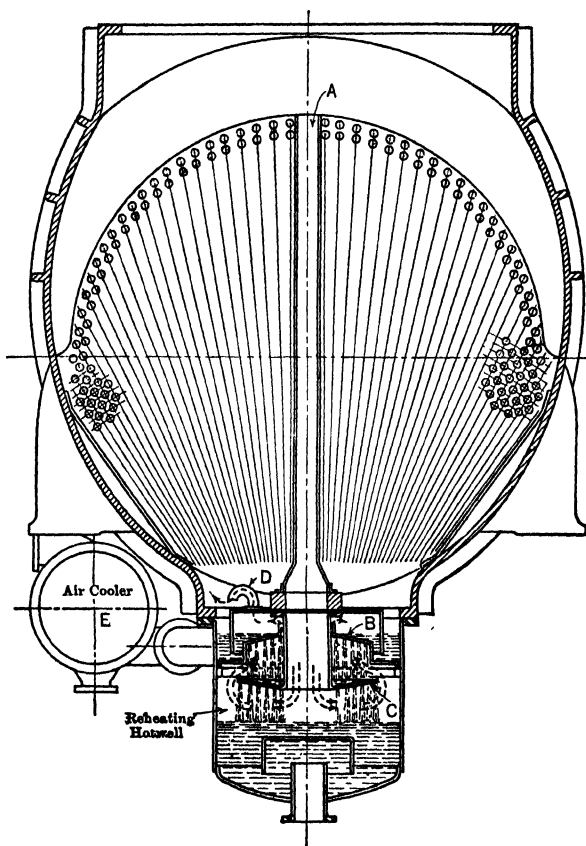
Cross section of Foster-Wheeler single pass surface condenser with reheating hotwell and external air cooler.
